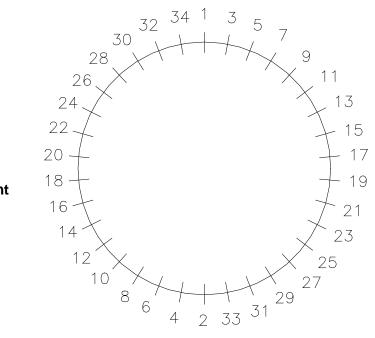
34 Bolt Torque Pattern 3.0 ksi Subsea Flexible Joint
